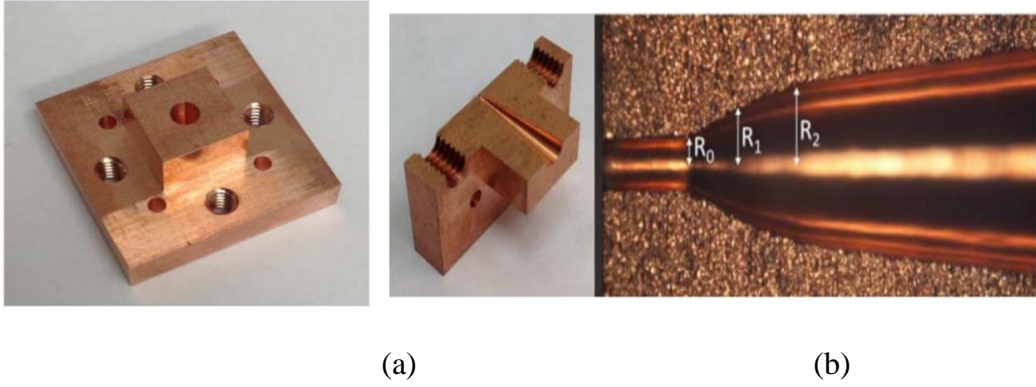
(a) Photograph of a fabricated 1.9-THz multiflare angle horn which was machined on a copper block drilled (b) Horn cut in half for dimension inspection [16].
